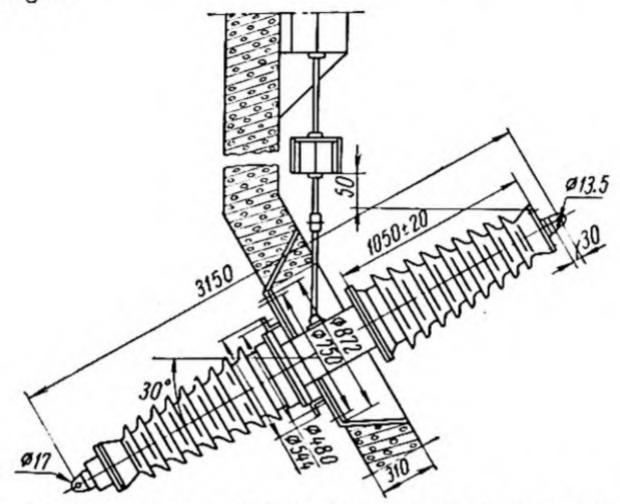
General view of a mounted MH-110 oil-filled bushing
